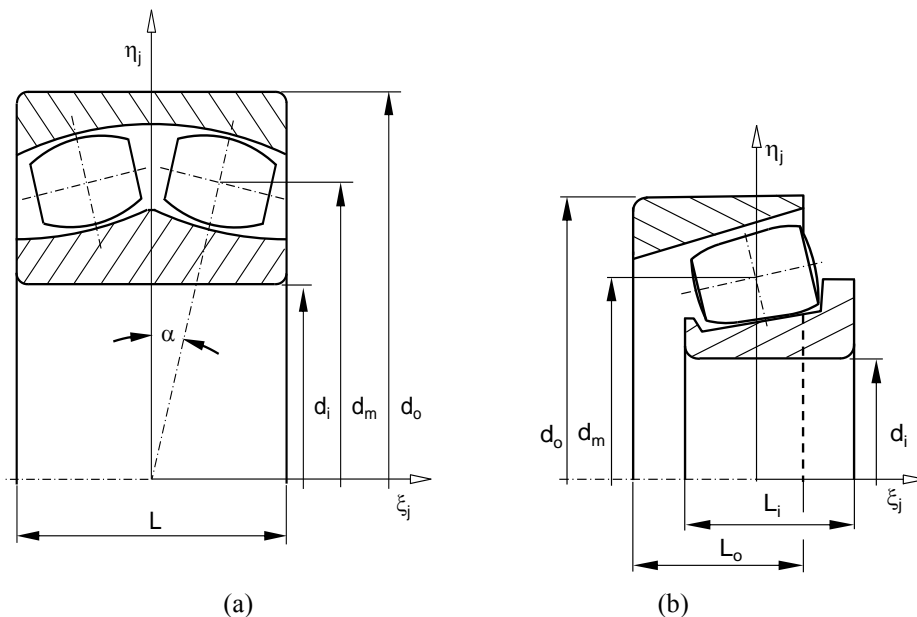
Bearing general dimensions: (a) Spherical; (b) Tapered.
